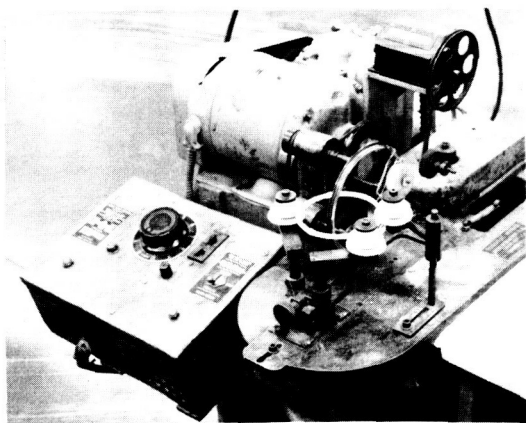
Toroid Winding Machine with Glass Spools Attached to the Revolving Platform
